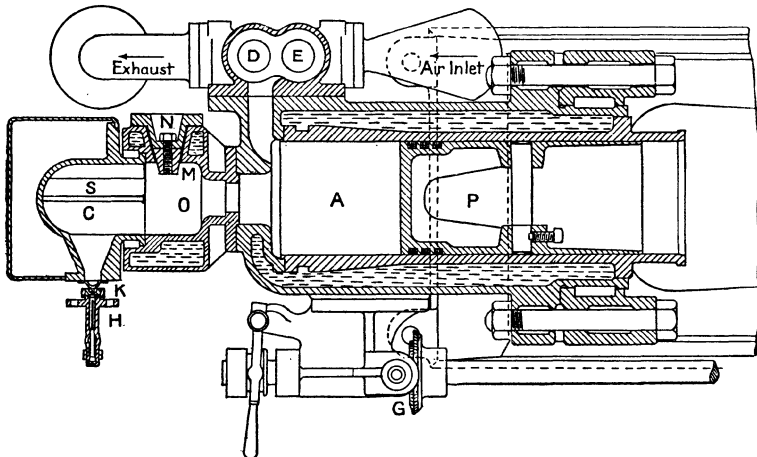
Hornsby-Akroyd Oil Engine (1900 Type), Sectional Plan
